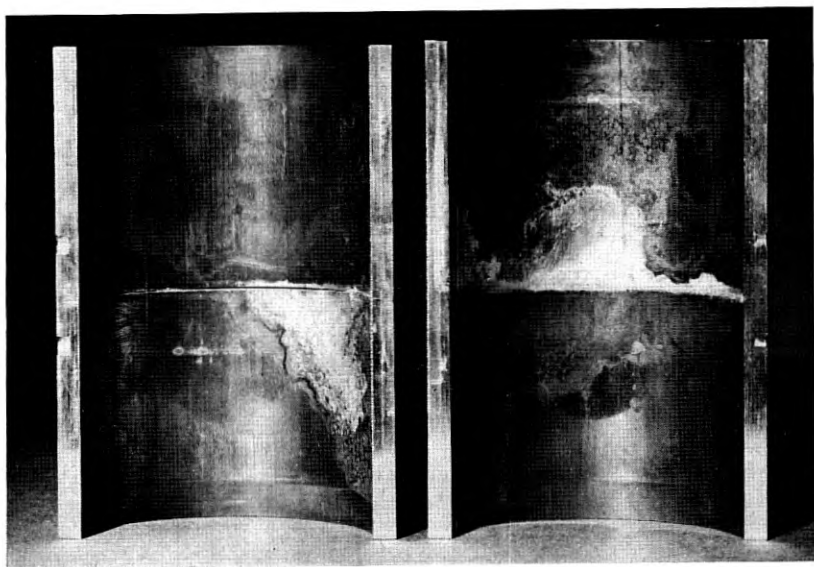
Defective joint caused by imperfect soldering which gave the reflection shown on Fig. 6.
